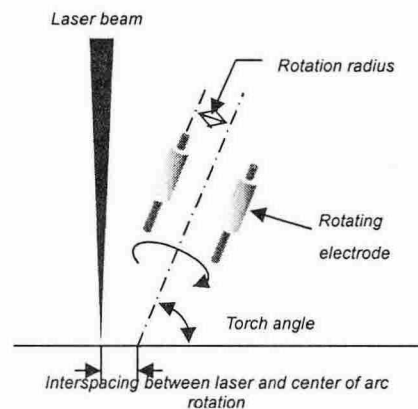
Schematic diagram of laser-rotating arc hybrid welding process
